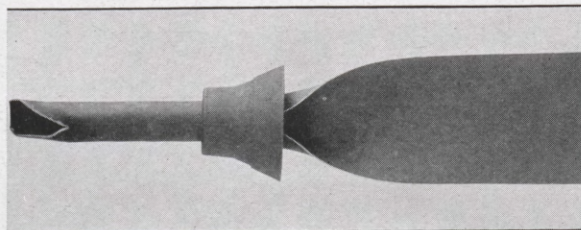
BUTT-WELD “COBBLE”—SHOWING BUTT-WELD PRINCIPLE
